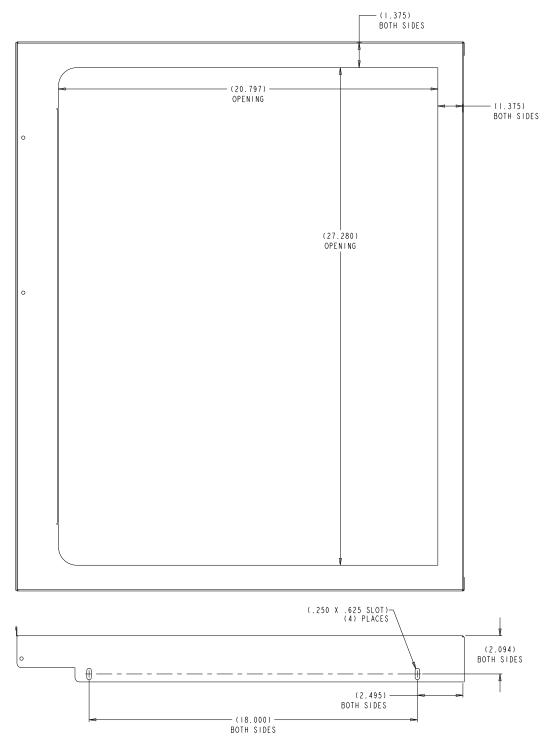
Reference Sheetmetal Cover Opening Dimensions for Mounting Icemaker.
